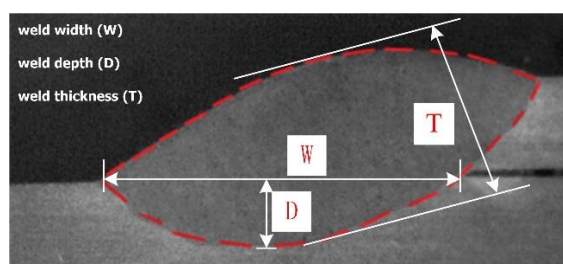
The cross-section of the weld bead. (weld width (W), weld depth (D), weld thickness (T)).
